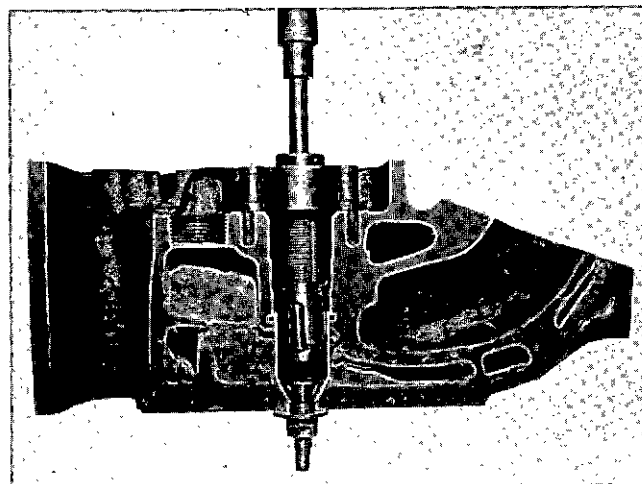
, V40227. Seal upper end of injector sleeve with ST-880
